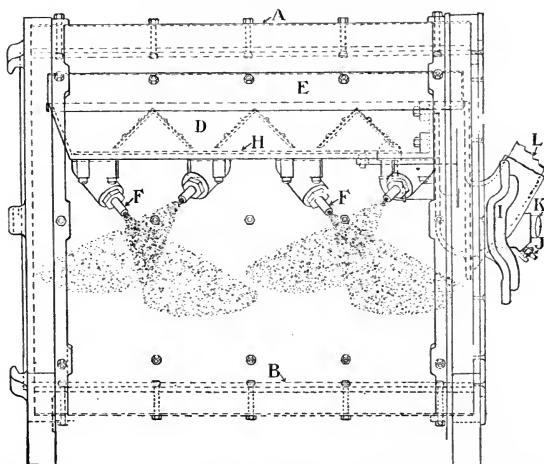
B—SIDE VIEW, SHOWING DETAILS OF SAND BLAST BARREL
